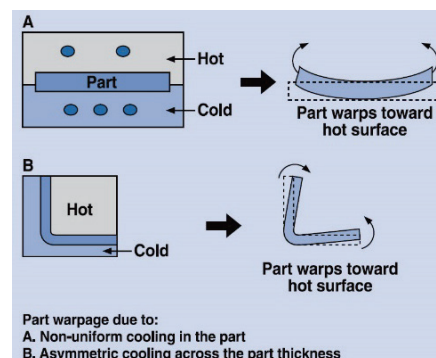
Moulded part warpage due to uneven mould temperature field [7]
